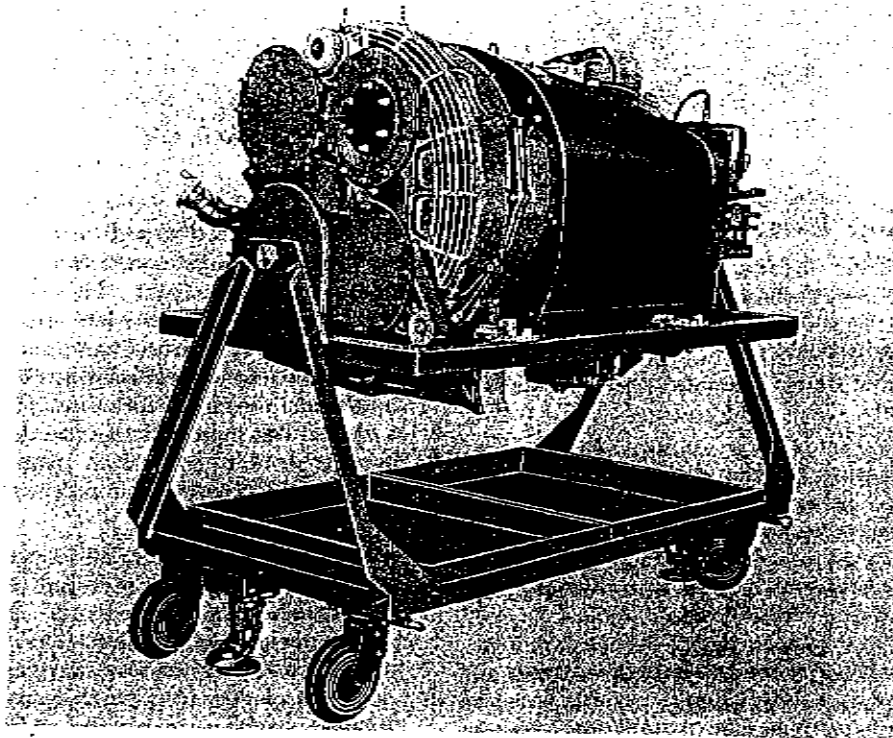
Typical Packette Mounted on No. J-5003 Transportation Stand
